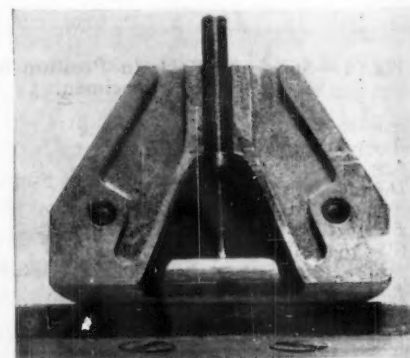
Mold for Vulcanizing the Rubber Buttons.
